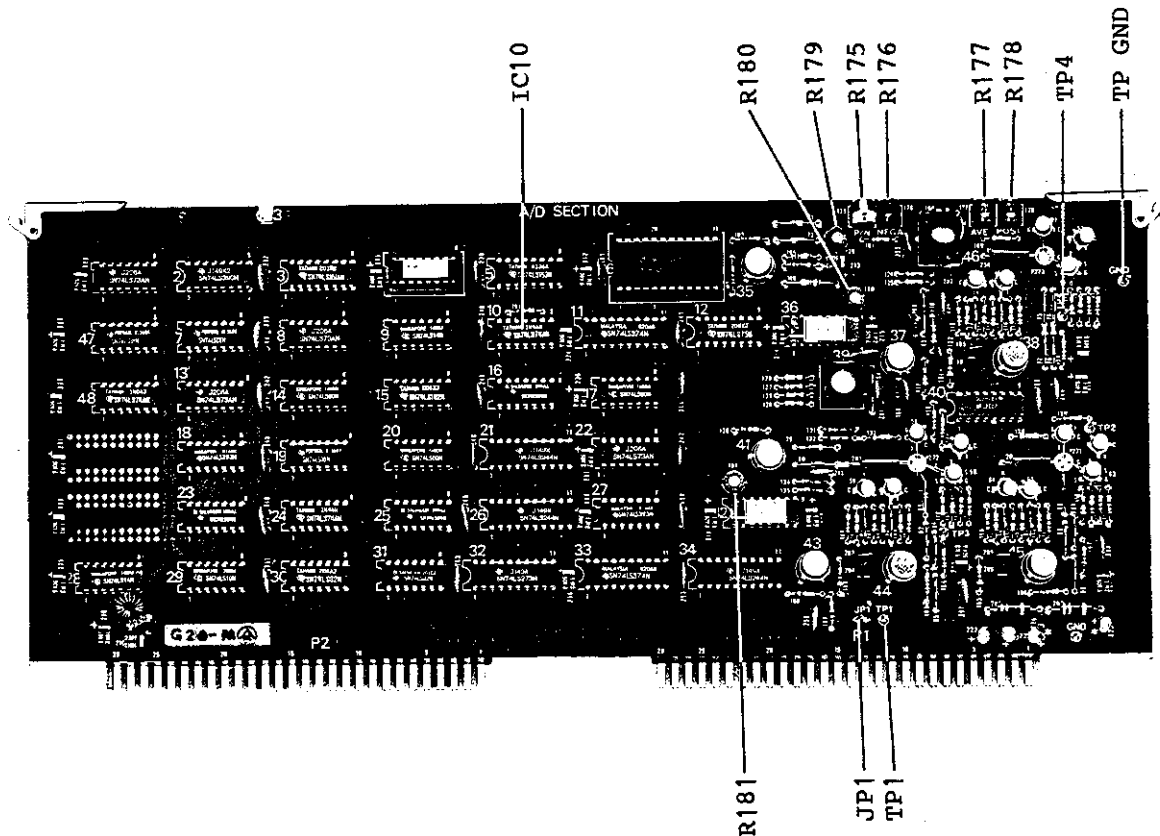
Locations of adjustment controls and test points on the A-D Converter (BGP-010187) board
